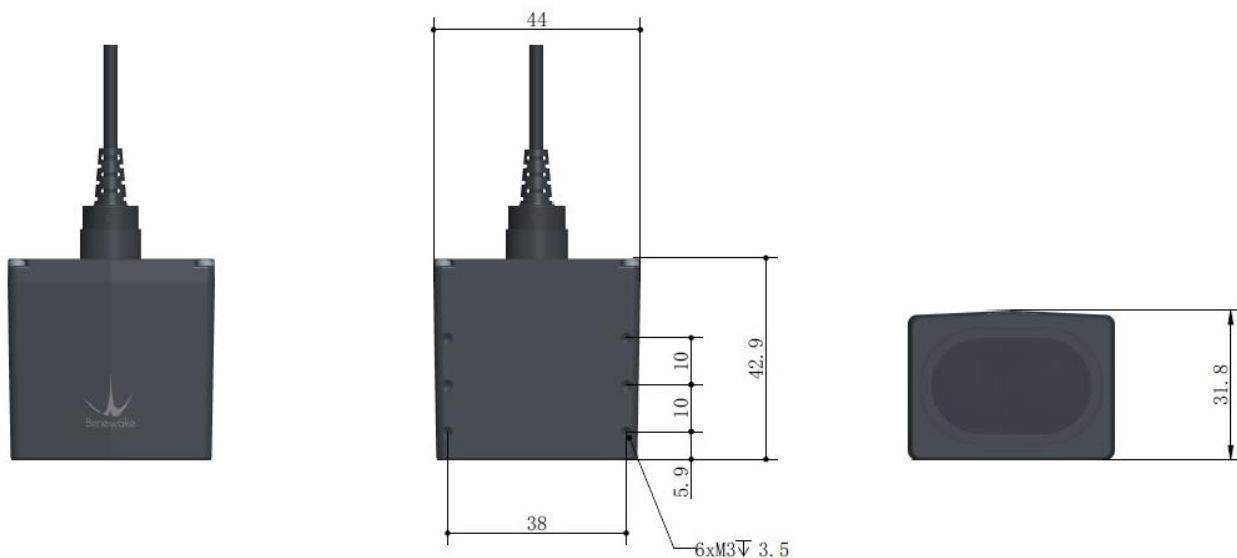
TF03 dimensions (Left 1: top view; Left 2: vertical view; Left 3: front view)
